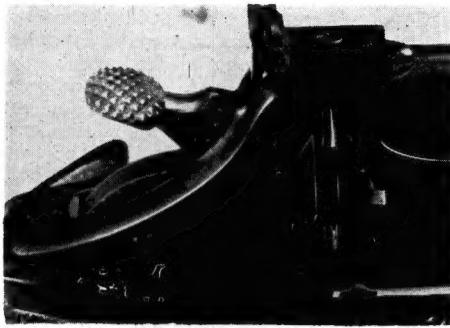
This new spur is attached to this S&W hammer with silver solder.
